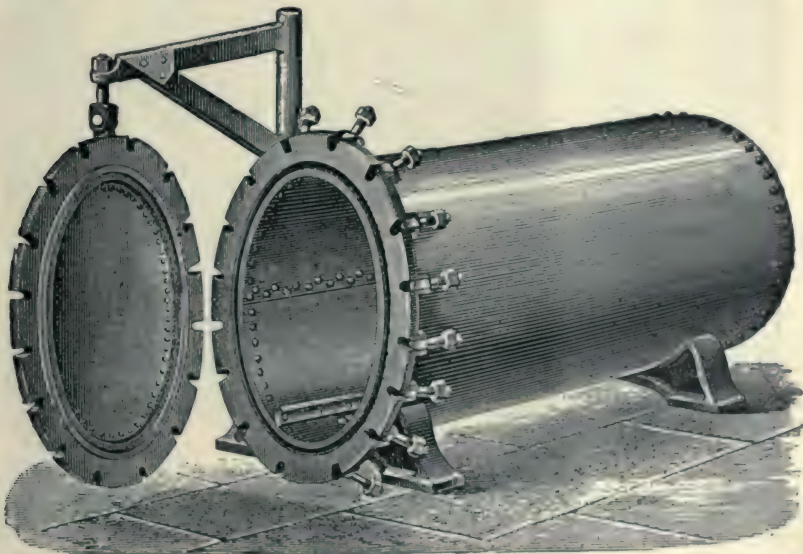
Coster, Rickkers, & Co.'s steam vulcaniser.
